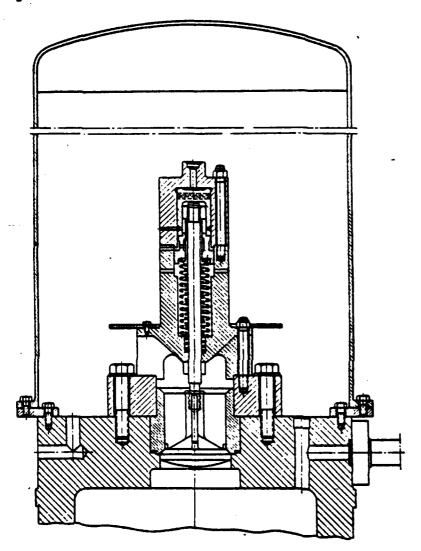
Construction/design of filler valve for the press with the individual pumping drive.
